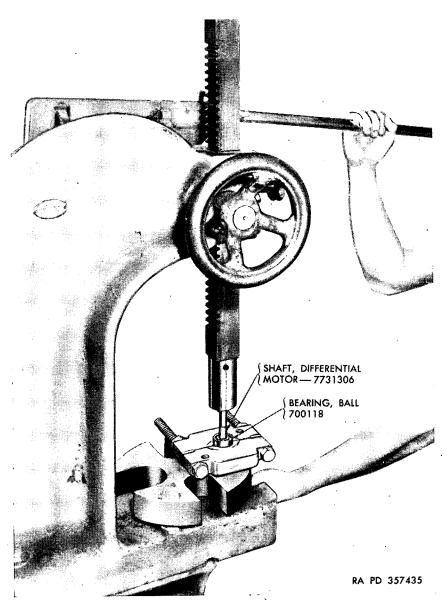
Pressing differential motor shaft out of differential carrier bearing.
